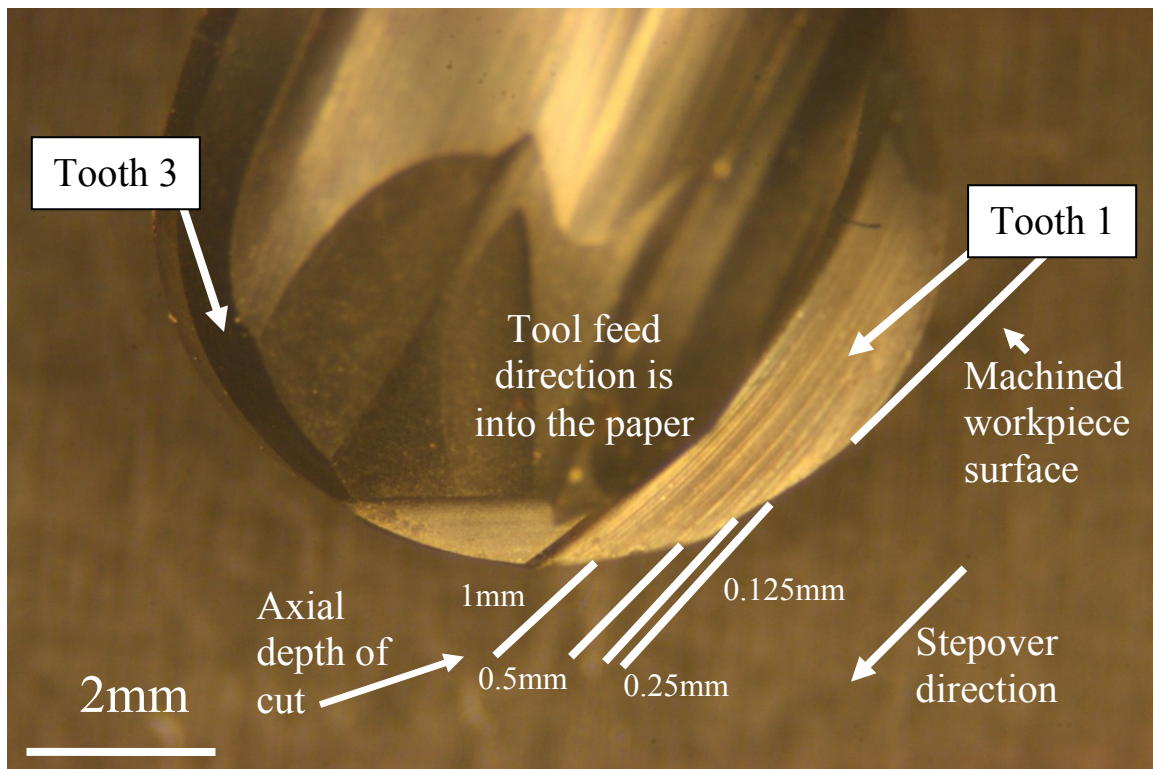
Side view of the cutters (Tooth 1 and 3 (odd))
